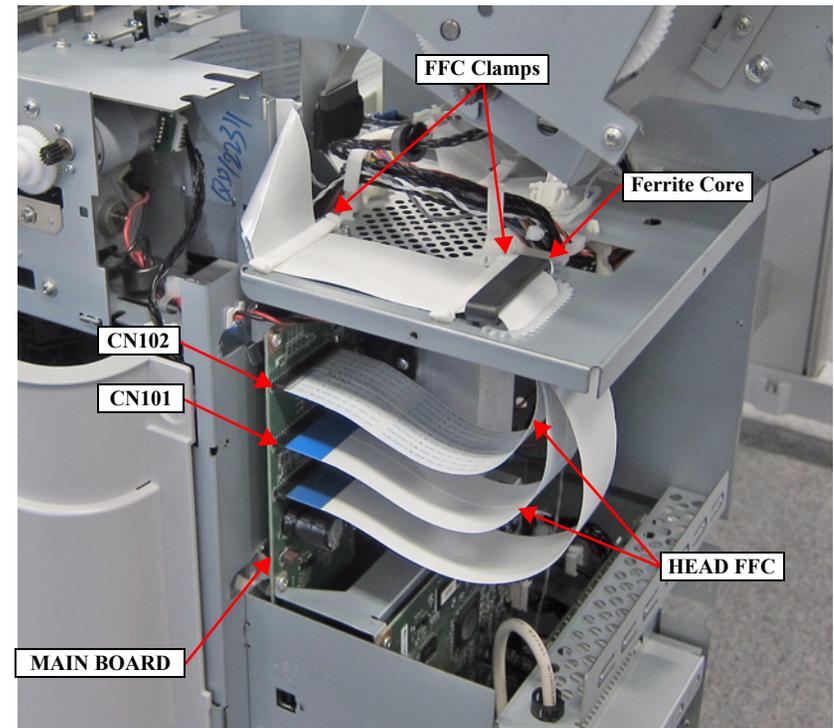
Removing the HEAD FFC (Around the Board Box)
